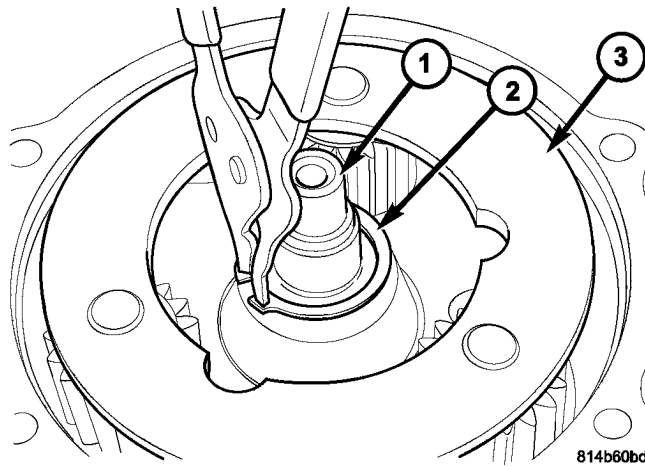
REMOVE SNAP-RING FROM INPUT SHAFT
